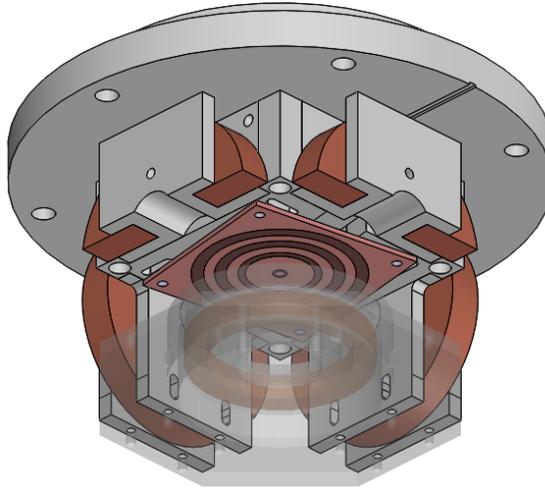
A 3D CAD rendering of the V1 chip holder. A bias coil is cutaway here along \hat{x} and \hat{y} to better show the assembly. A z coil is mounted below the chip, shown here transparently. The other z coil is mounted above the chip (not shown). The assembly is suspended underneath a water-cooled flange to improve temperature stability. Bragg beams and horizontal imaging axes lie within the horizontal bias coils.
